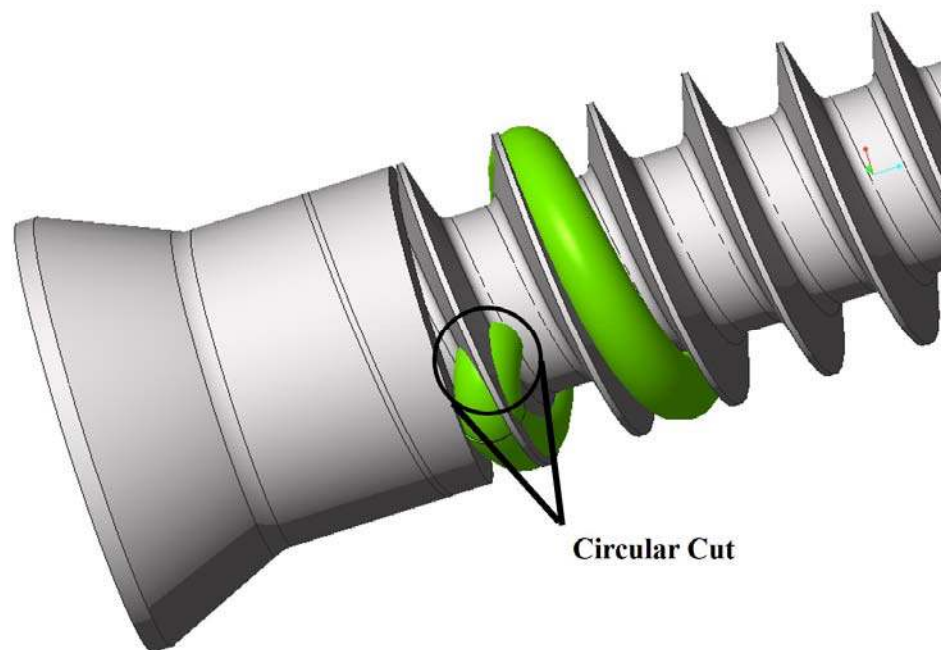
The SMA helical insert is fused to the holes on the surface of the screw.
